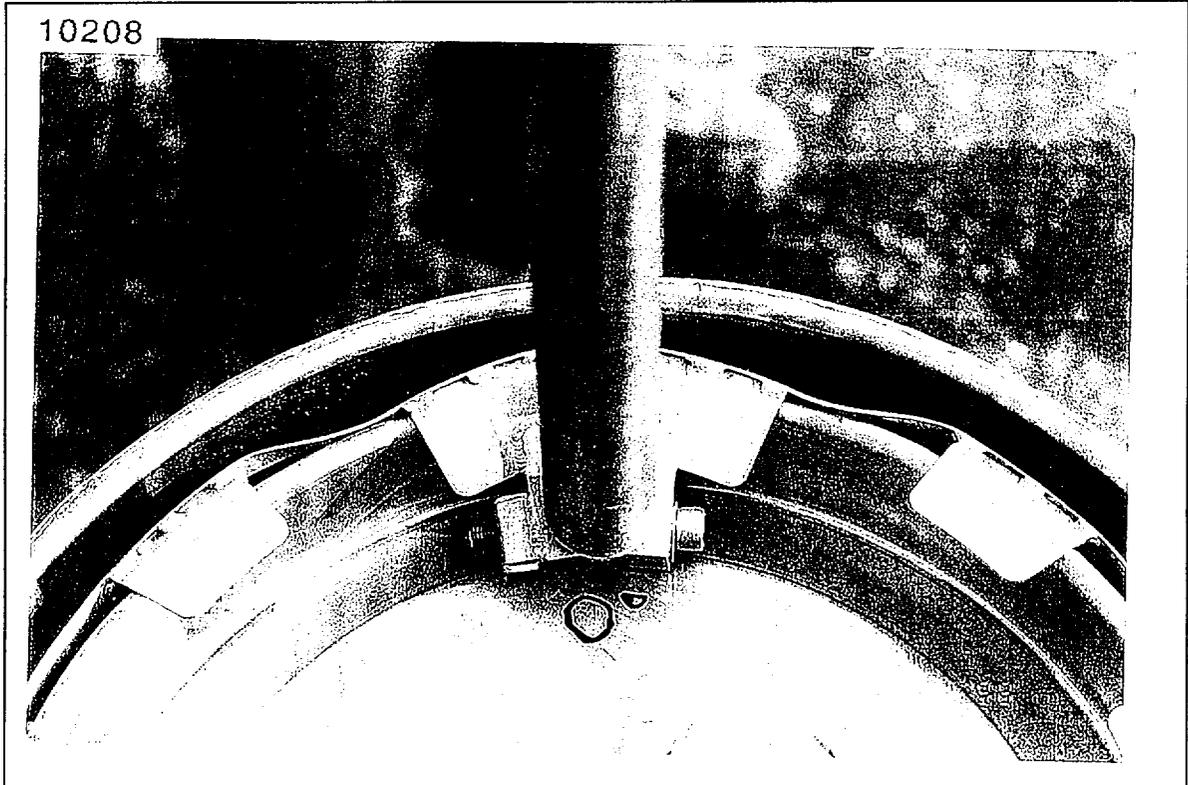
Deformation after drop height 1,2 m, specimen P4.
